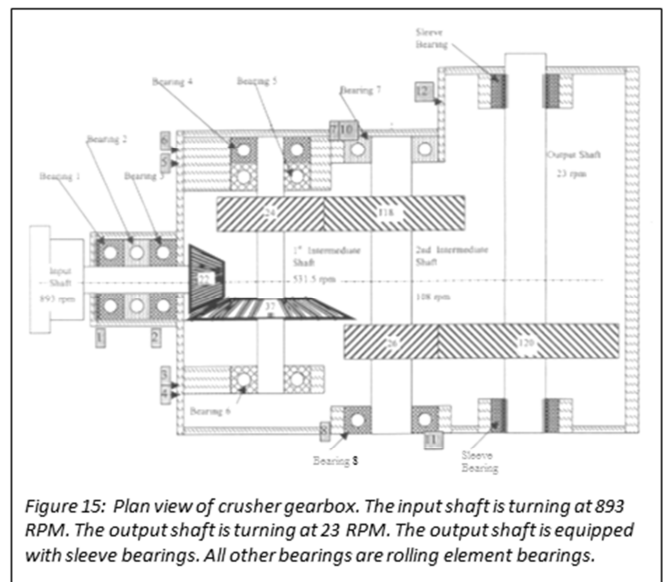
Plan view of crusher gearbox. The input shaft is turning at 893 RPM. The output shaft is turning at 23 RPM. The output shaft is equipped with sleeve bearings. All other bearings are rolling element bearings.
